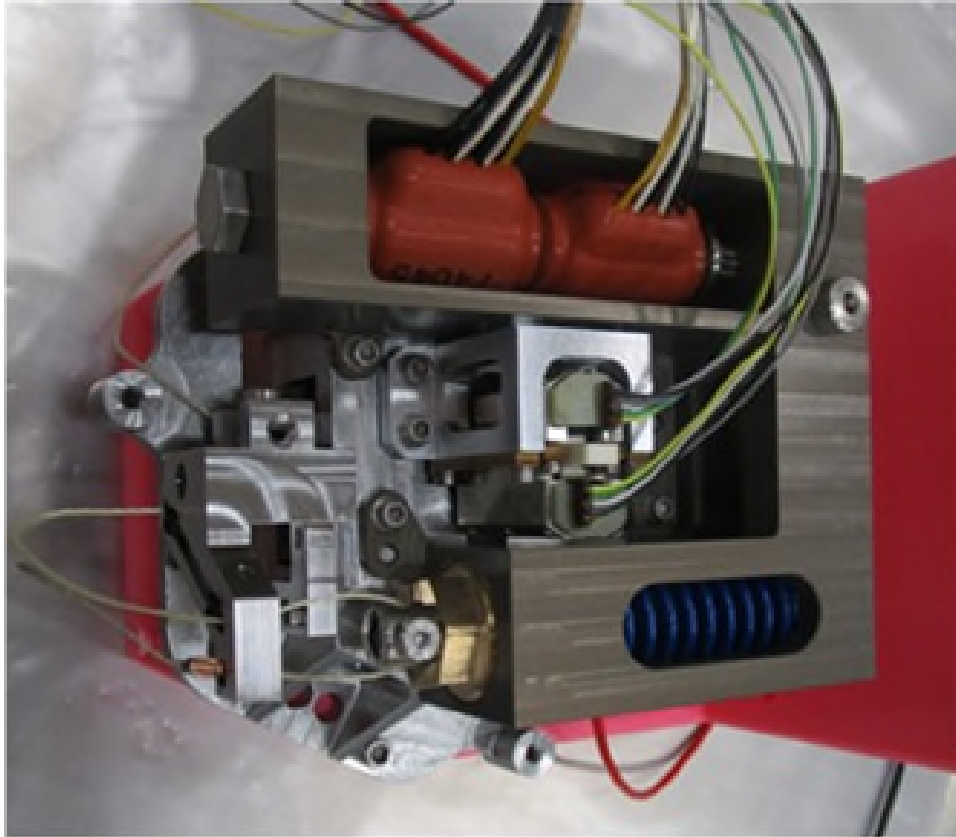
Fully assembled CM during integration of radial clamp tensioned cable.
